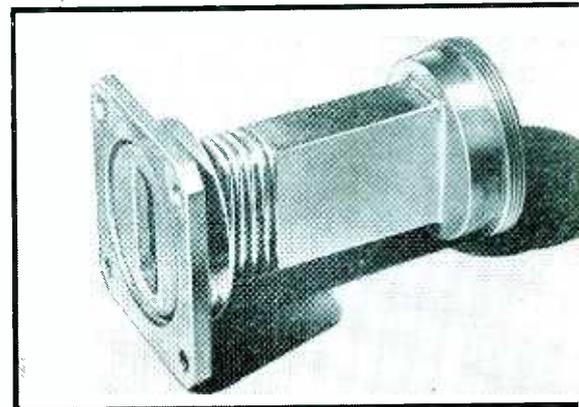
An assembly of rigid guide and seamless flexible guide joined by soft-soldering
